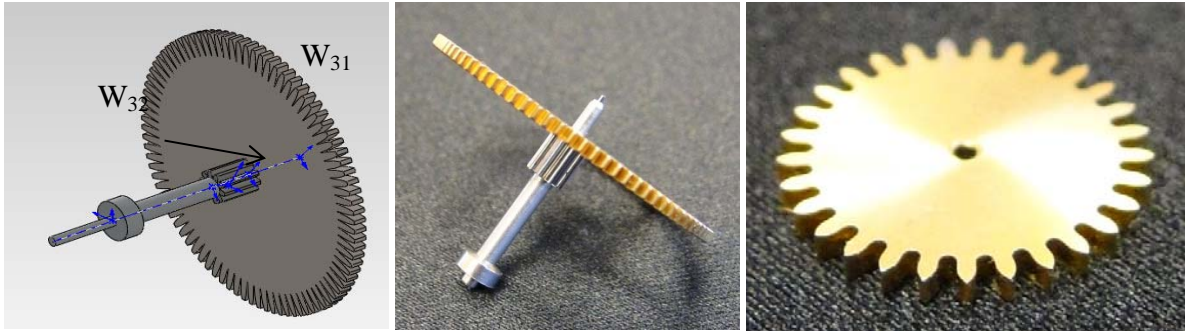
Third wheel, W_{31} , pinion, W_{32} , and wheel, W_{33} on arbor 3 - (a) SolidWorks image, (b) actual component, (c) actual component
